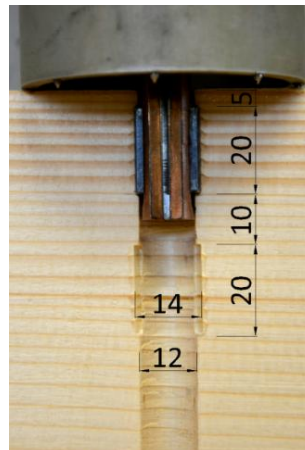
Detail of the drawbar with the wedge and rounded jaws
